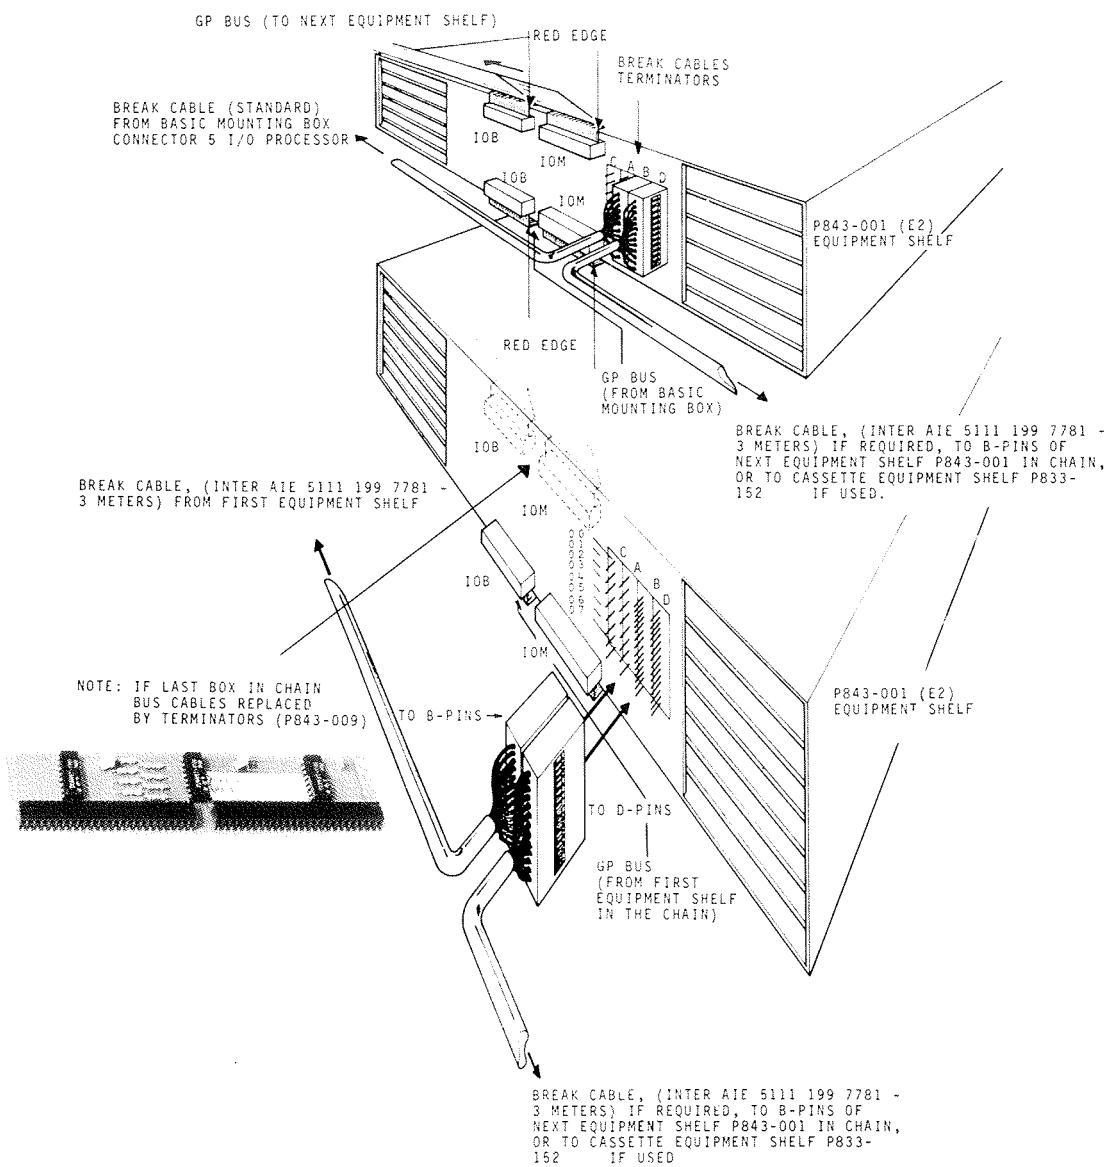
BUS AND BREAK CABLE EXTENSION (E2) (USING P843-001 EQUIPMENT SHELF)
